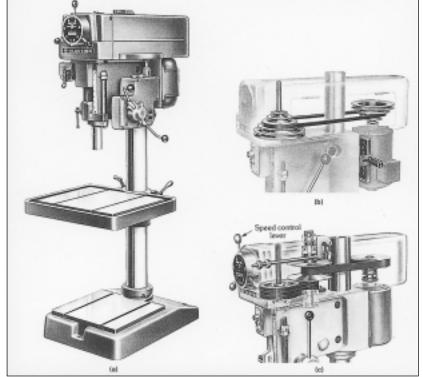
a) a sensitive drill press is used for drilling holes; b) speeds on a stepped V pulley drive are changed by hanging the position of the V belt; c) speeds on a variable-speed drive mechanism are changed by the handwheel on the head. (Courtesy Clausing Industries, Inc.)
